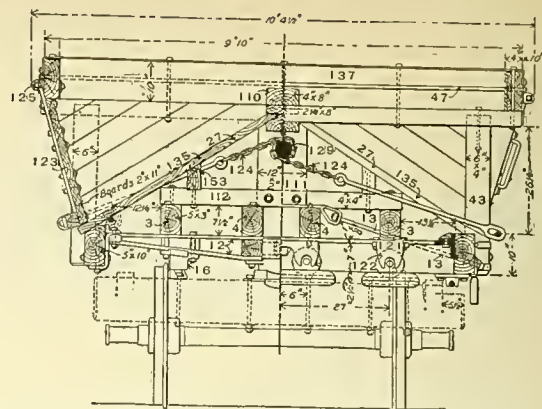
Half Cross Sections through Bolster and Near Car Center, showing the Method of Attaching Car-body to the Center Truck and the Manner of Operating Side Doors.
